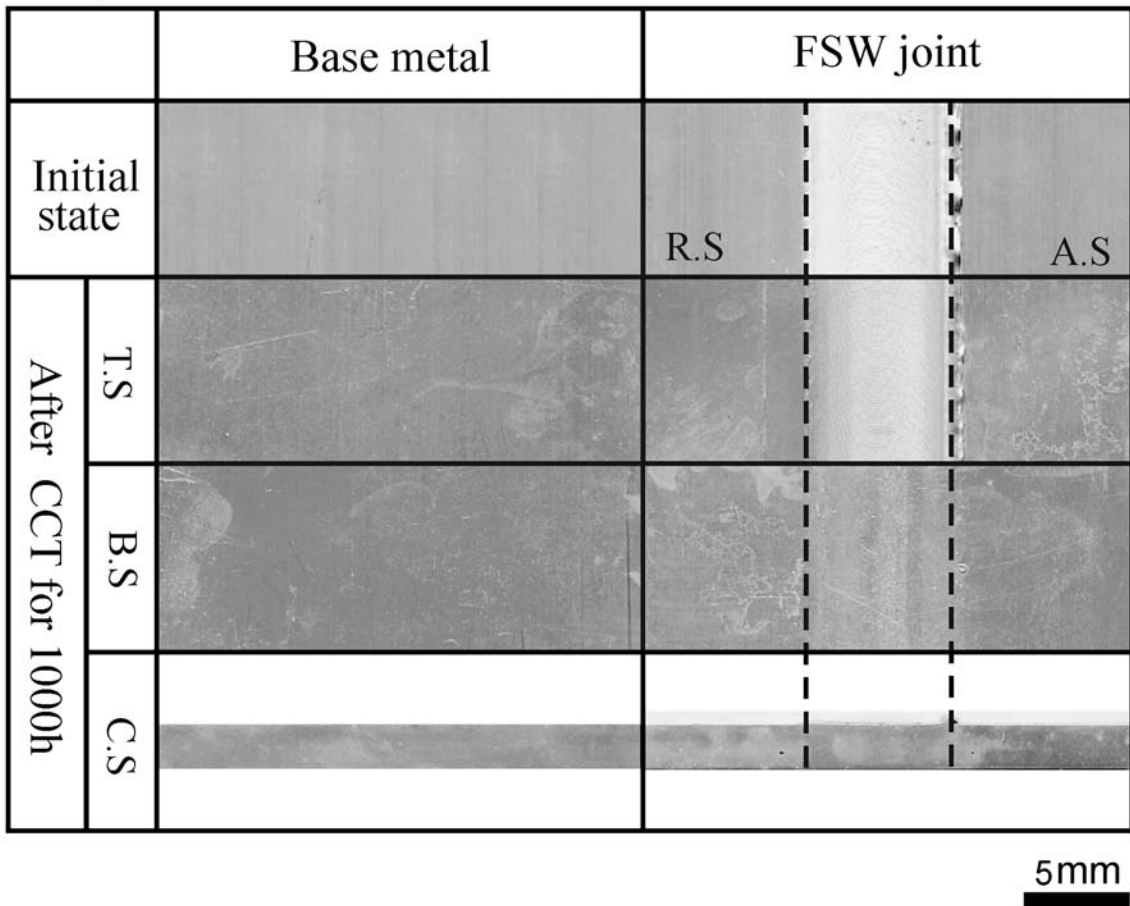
Macroscopic surface appearance of FSWed A6N01-T5 sample after cyclic corrosion test for 1000 h.
